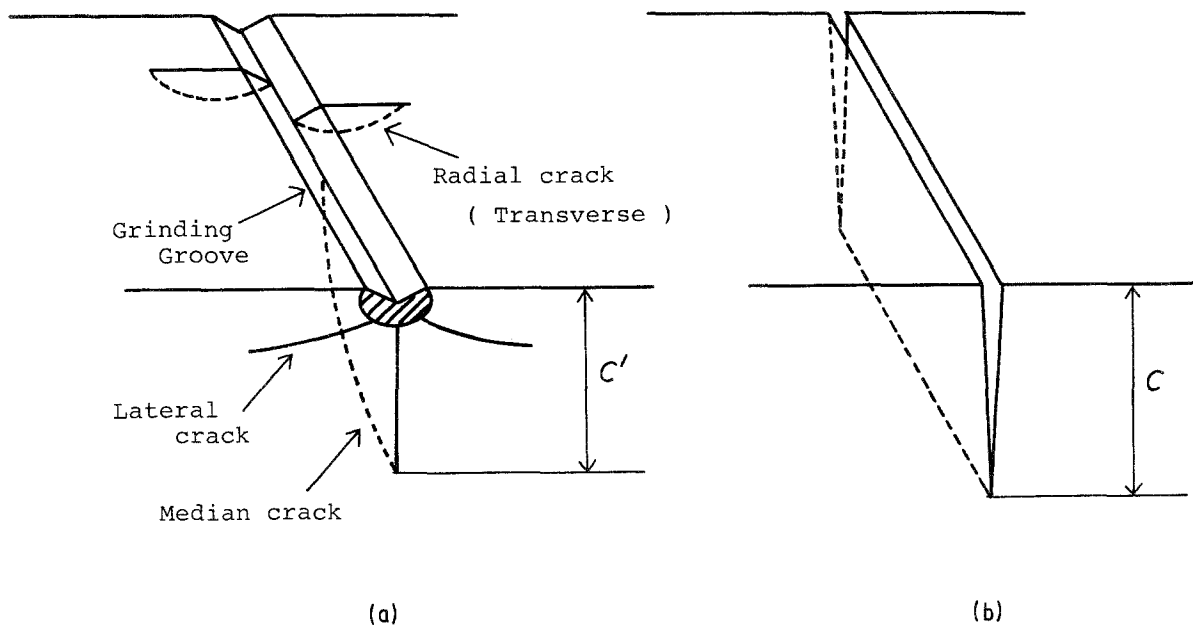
Schematic drawing of the scratch cracks caused by grinding: (a) scratch-cracks systems after Richerson [6]; (b) equivalent part-through edge crack.
